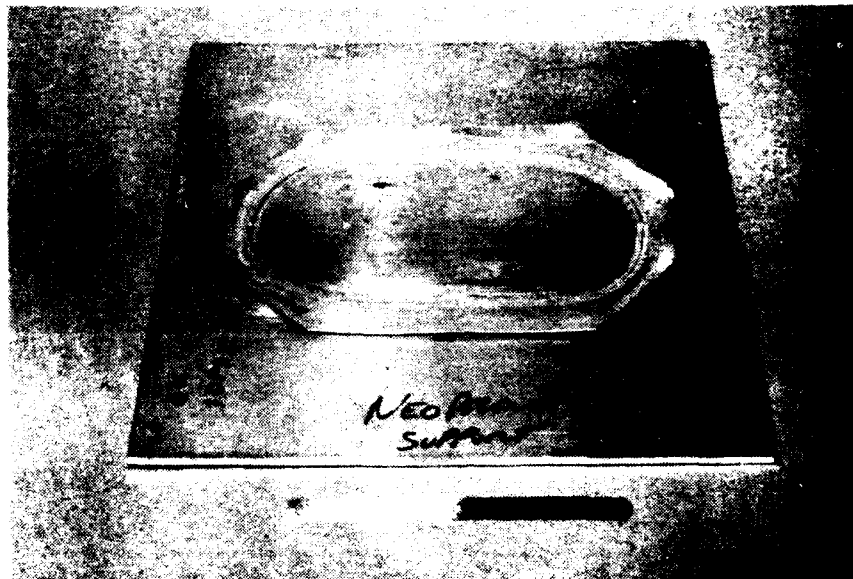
Pressure tested explosive patch weld on 0.250 in.-thick 6061-T6 aluminum base plate with styrofoam backup support.
